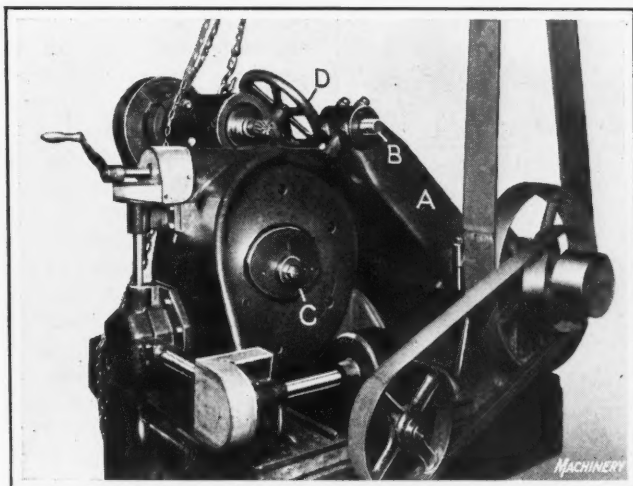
Cam Milling Machine with Cutter-head in Elevated Position, showing Master Cam and Faceplate Feed Mechanism
